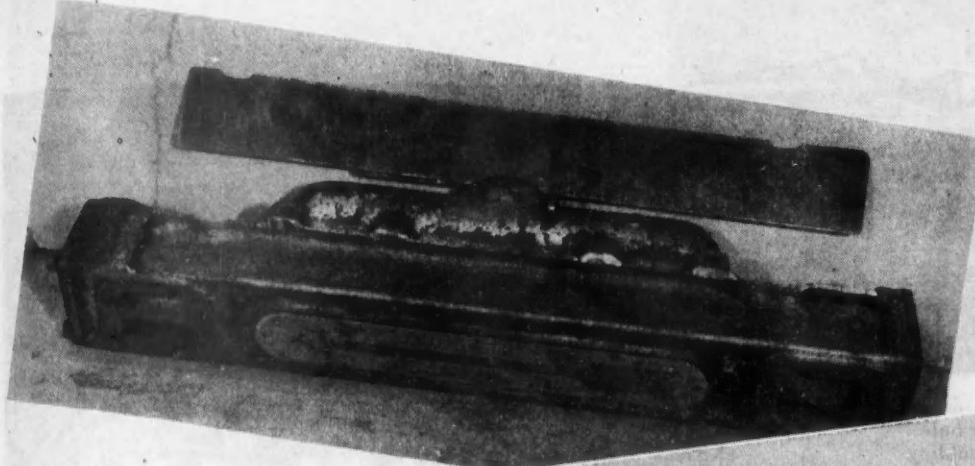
, left. Steel plate was bronze welded in place by surface heat procedure with a 3/32-in. rod and a No. 0 head. Bolt holes were then built up with bronze
